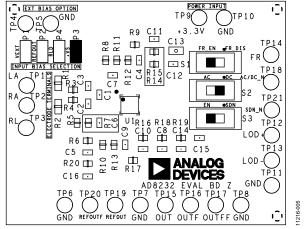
AD8232-EVALZ Evaluation Board Top Assembly
